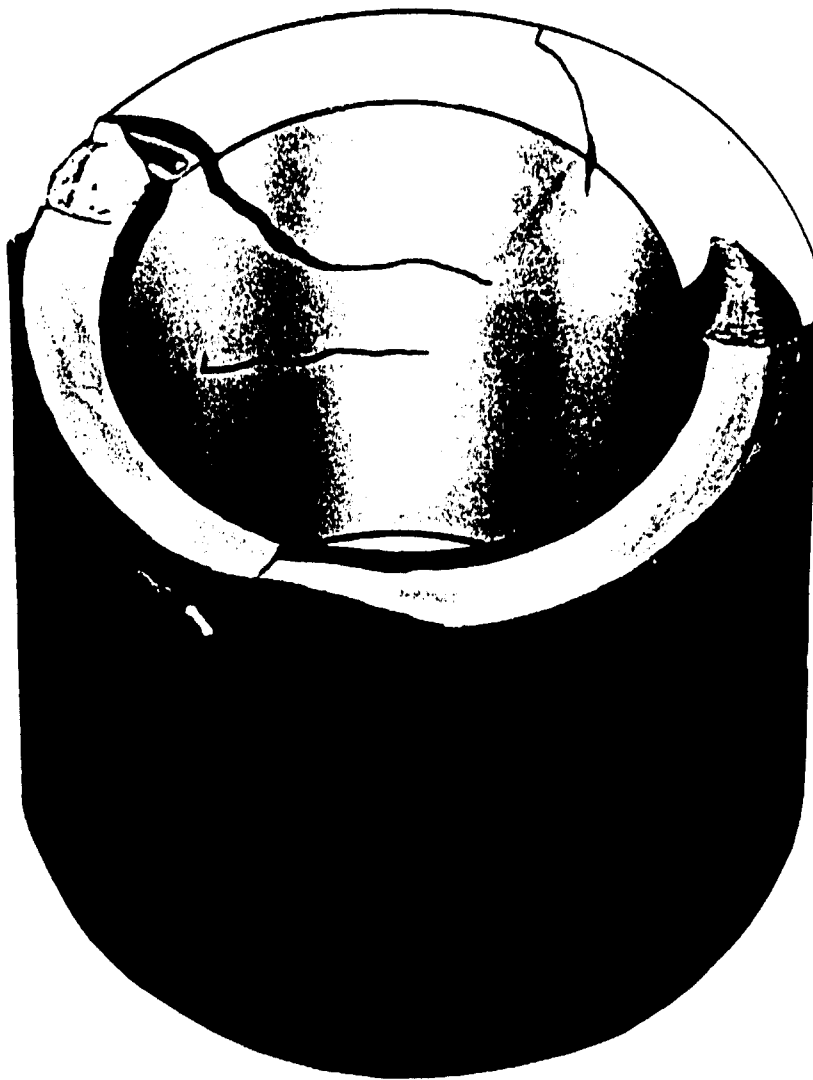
Segment of gun tube with fracture located near muzzle end (M2).
